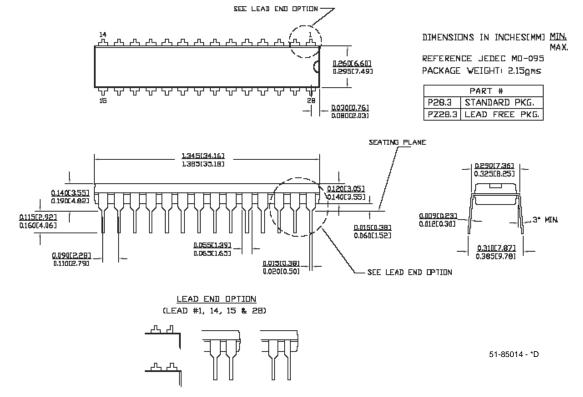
28-Lead (300-Mil) Molded DIP
